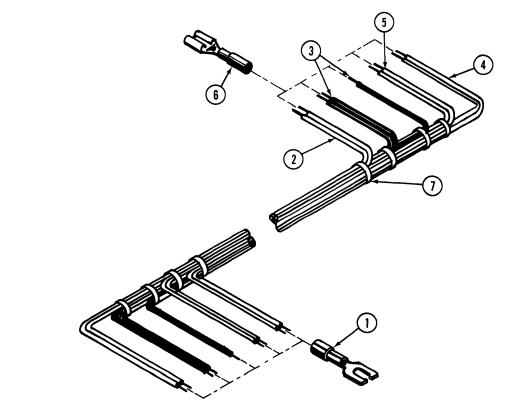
26097-01 DC POWER CABLE ASSEMBLY
